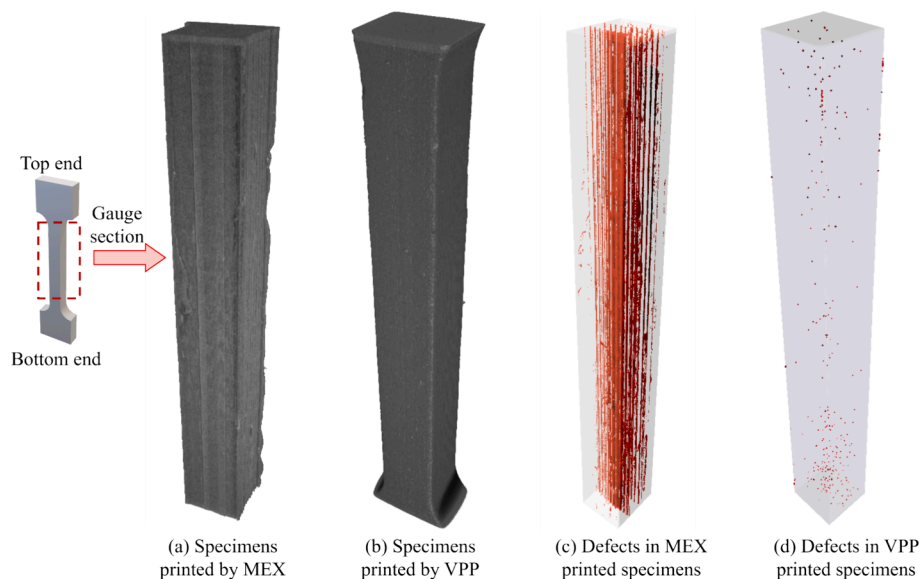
CT scanning results of (a) dog bone specimen printed by MEX, (b) dog bone specimen printed by VPP, (c) defects inside MEX printed specimen, and (d) defects inside VPP printed specimen, where only the gauge regions (parallel section) were displayed here as the region of interest.
